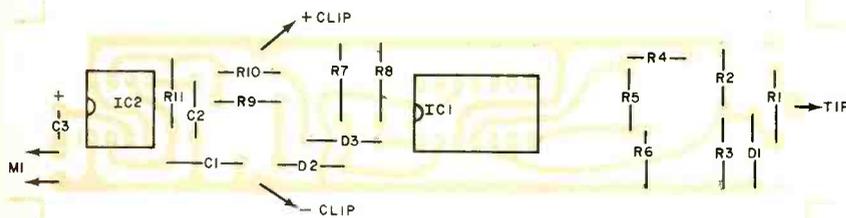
Actual-size foil pattern and component installation for printed-circuit board of suitable size for placing the probe in a tube.
